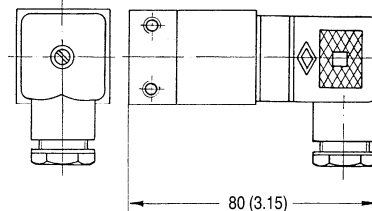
Contact Kontakt K17, dimensions in mm (inches)
